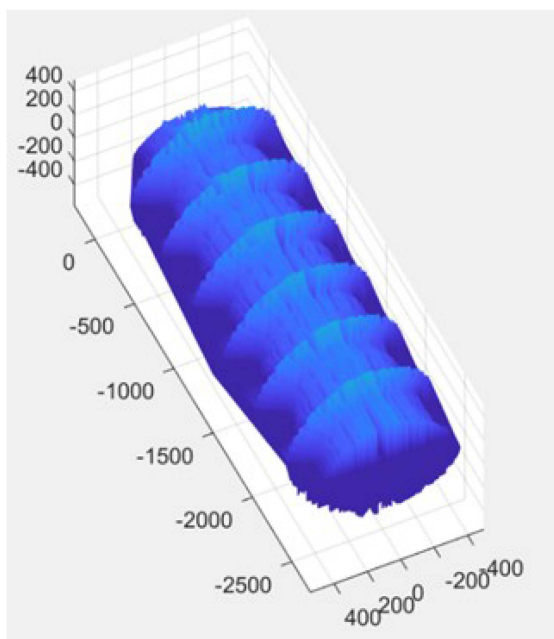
Internal M6 thread with 1 mm pitch, measured using the touch probe method and a commercially available RG405 coaxial manufactured into a side probe.
